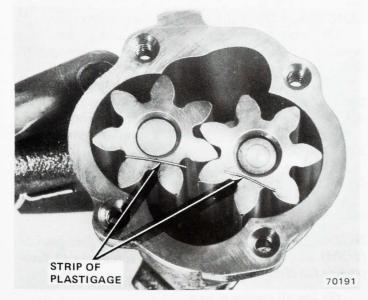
B-95 Oil Pump Gear End Clearance—Plastigage Method
